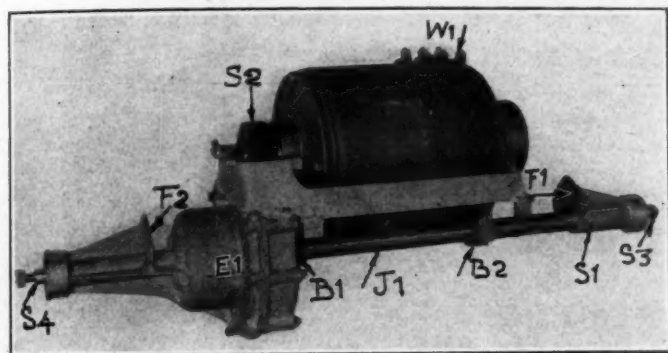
Westinghouse motor with a double-reduction gear, the primary reduction being with a silent chain
